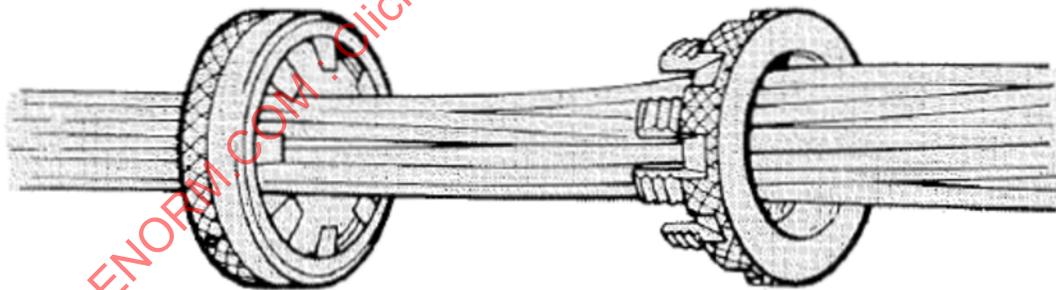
STEP 1 OF ASSEMBLY INSTRUCTIONS
